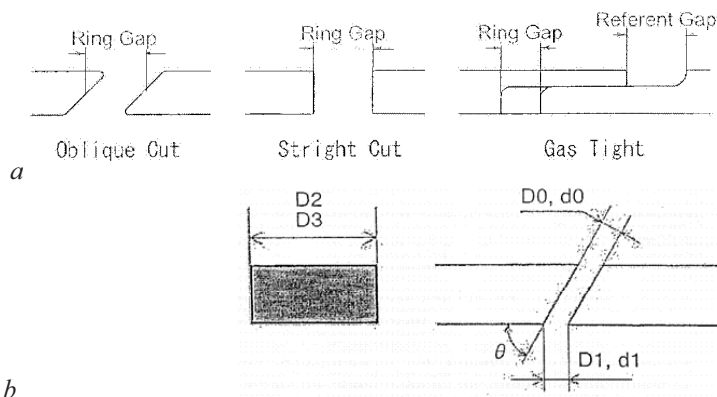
Measurement of piston ring gap: a – types of piston ring gaps, b – piston ring gap dimensions [4]
